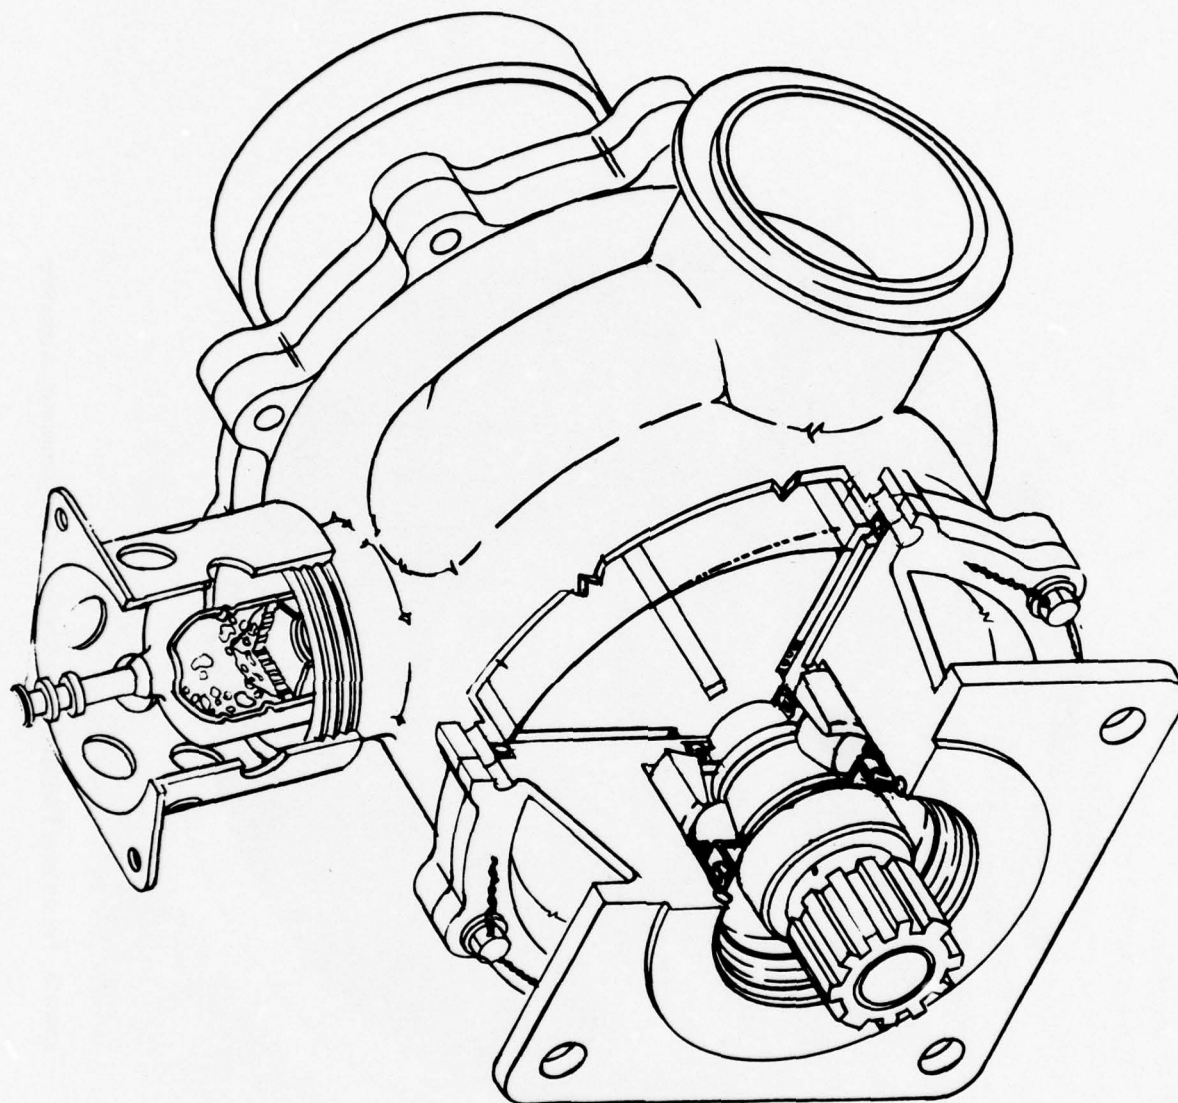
Isometric View of Hot Gas Rotary Valve Motor
